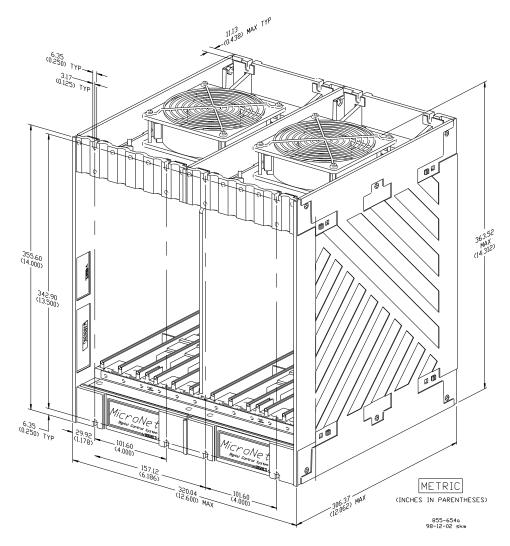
Outline Drawing of MicroNet Plus 8-Slot Chassis
